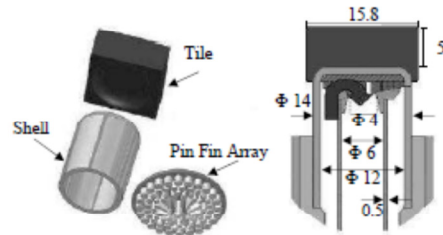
Exploded view [left] and cross-section [right] of the HEMP divertor.⁵ Dimensions in mm.
